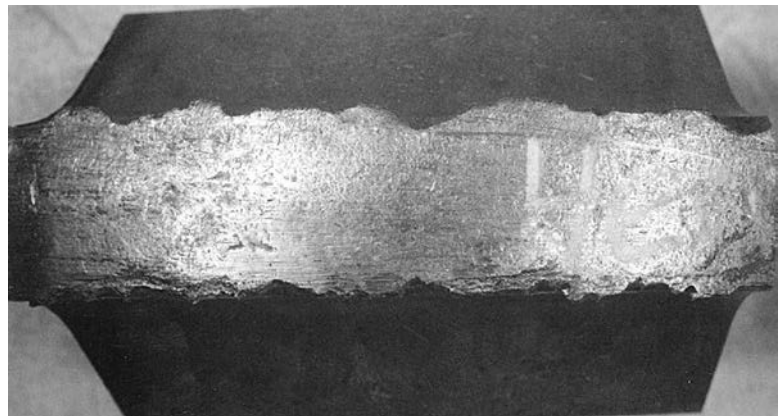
Disk cutter, comprised of H13 tool steel, showing material fracture at edge of contact surface
